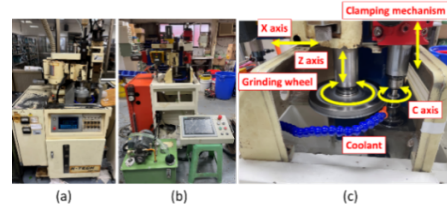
Centering machine (a) before: cam-driven (b) after: servo-driven (c) control elements of developed machine
